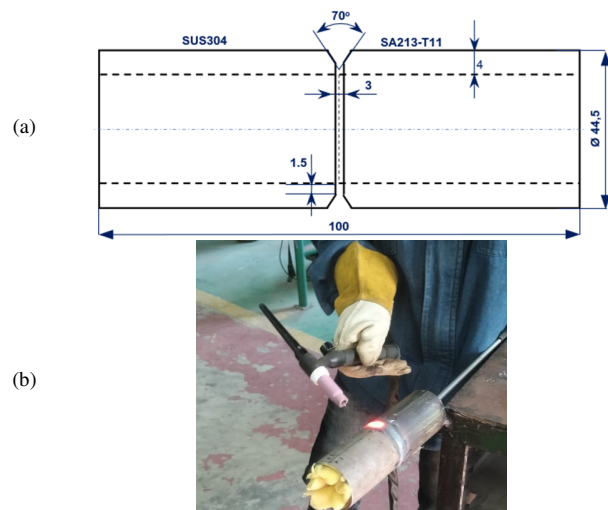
Welding set-up: (a) butt-joint design, (b) welding process.
